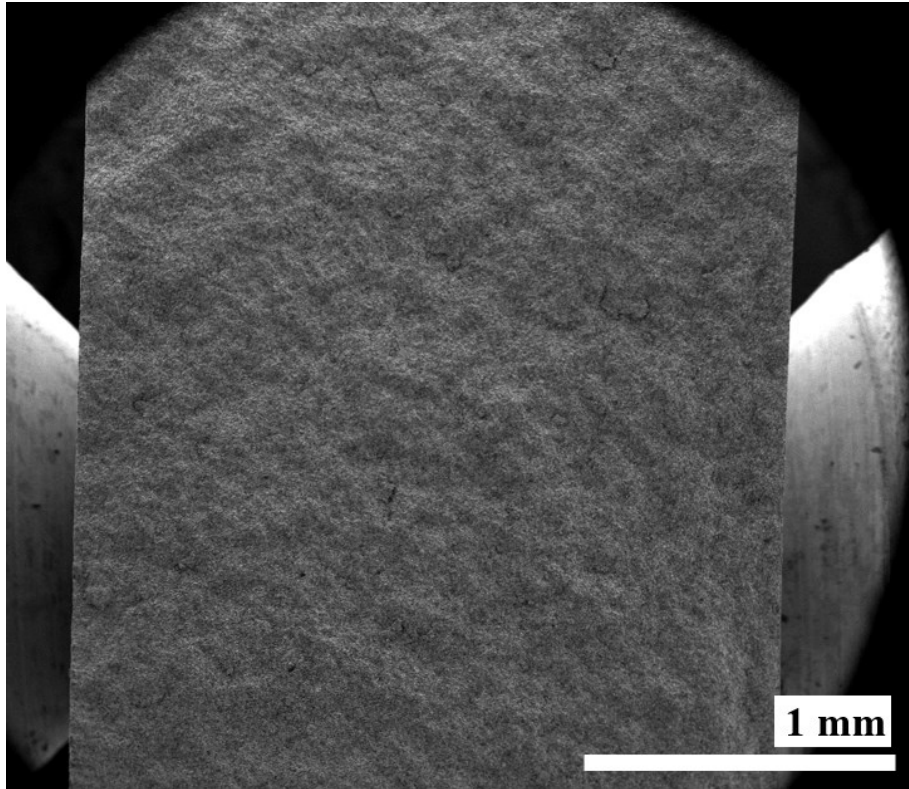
Macroscopic fracture surface of ZrC-30% SiC
